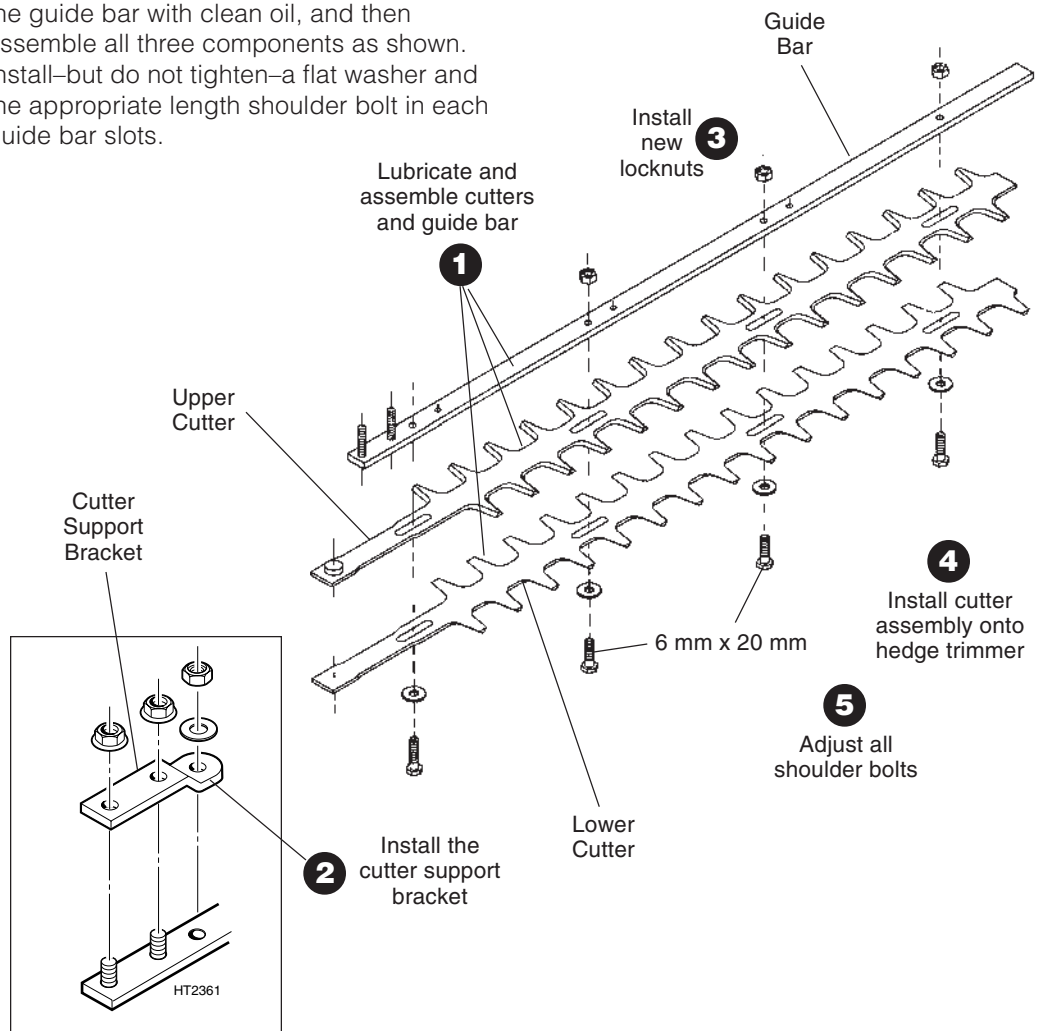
Reassembling the DH230 Cutter and Guide Bar.
